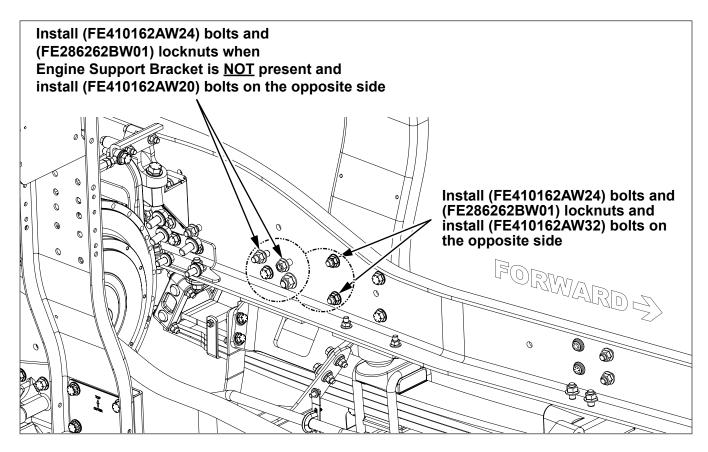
, Without Engine Support Bracket - Inside View - Engine Hidden for Clarity
